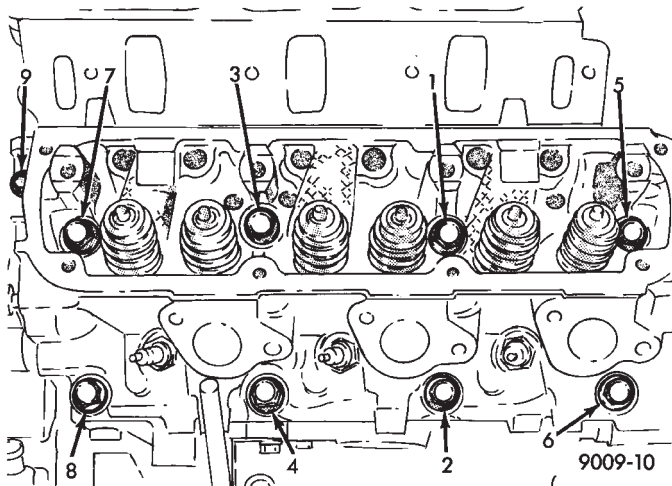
Cylinder Head Bolts Location and Tightening Sequence
